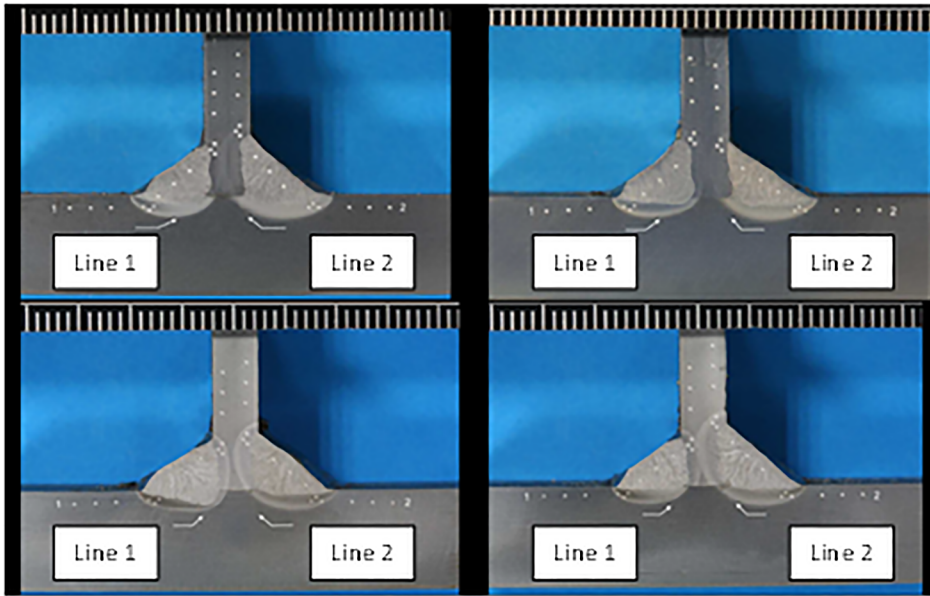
Macrographs of T-shaped welded specimens.
